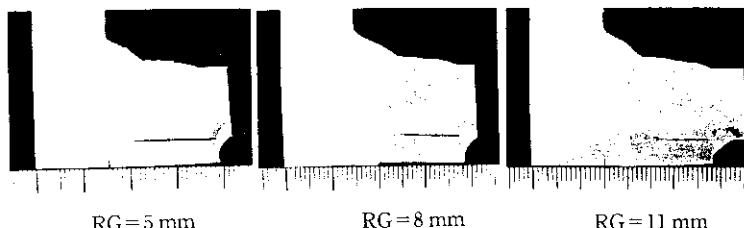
Examples of macroetch specimen of robot-welding
